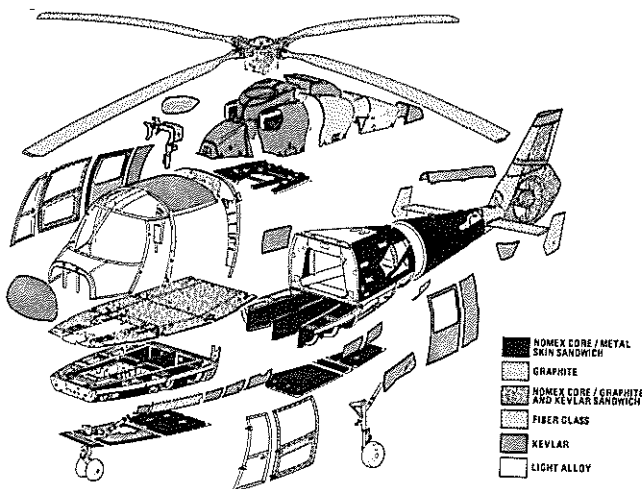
DAUPHIN SA 366 G1 : EXPLODED VIEW
